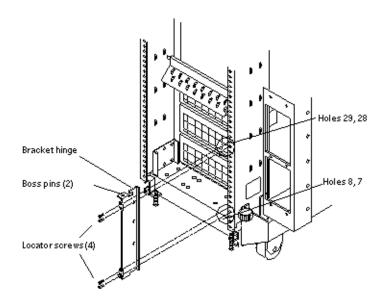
Installing the Terminal Concentrator Bracket Hinge to the Cabinet
